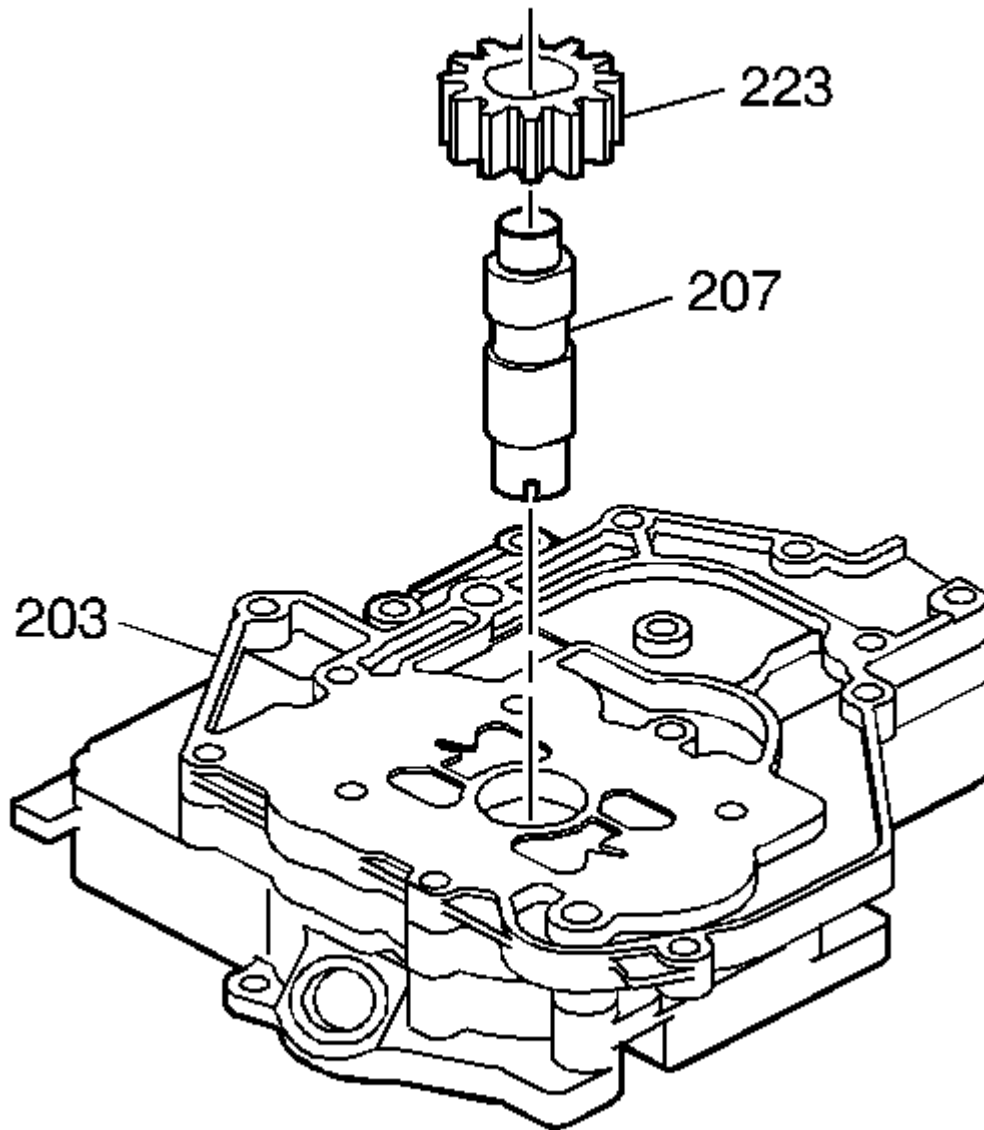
Oil Pump Driven Shaft & Scavenge Pump Drive Gear
